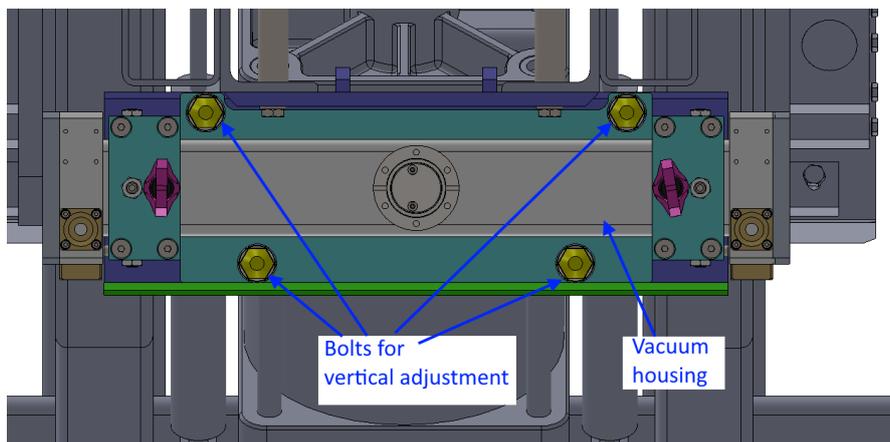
Top view of the vacuum housing showing the bolts for its vertical adjustment
